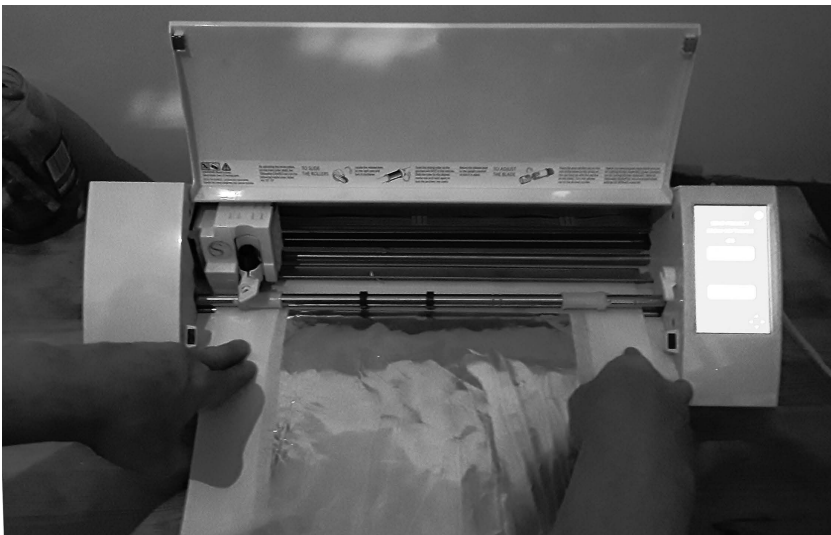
Feeding a foil sheet with adhesive backing, placed on a white cutter mat, into the craft cutter.
